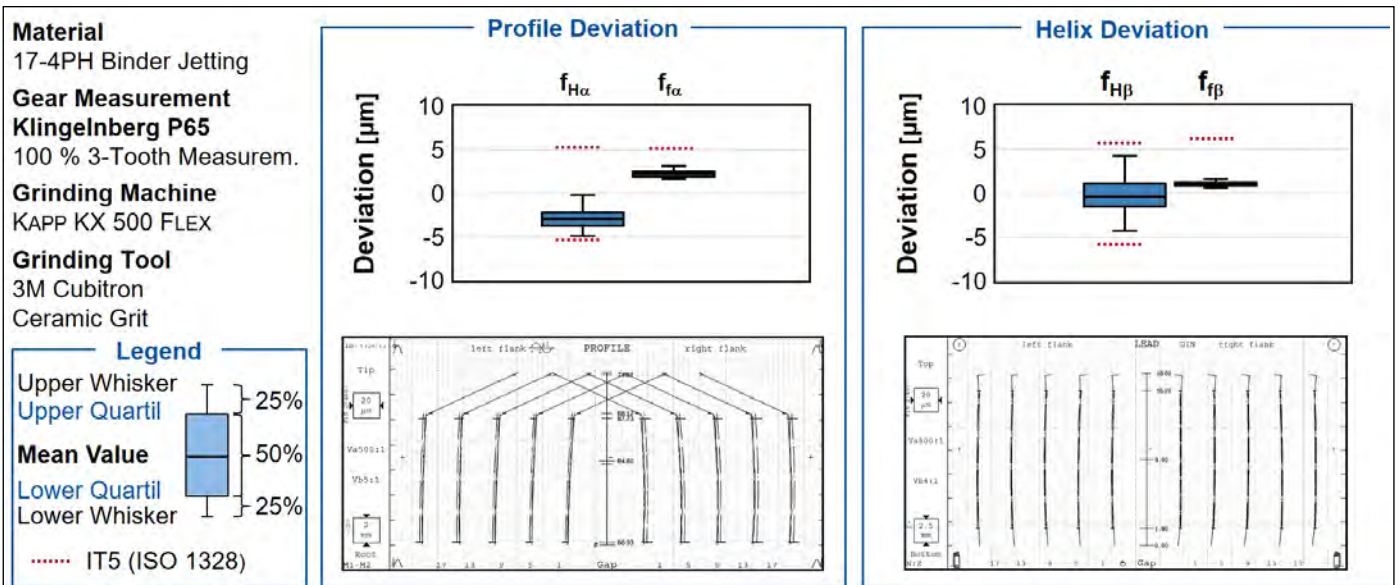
Gear measurements after hard machining of the BJT gears made of 17-4PH.
